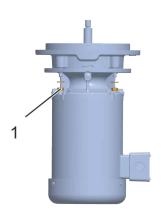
Fitting the intermediate casing (example: herborner.F-N)
